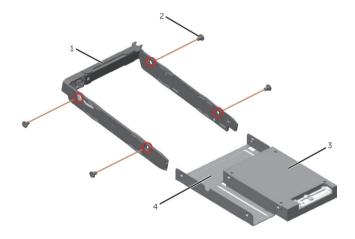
Removing and installing an HDD adapter into a 3.5-inch HDD carrier
